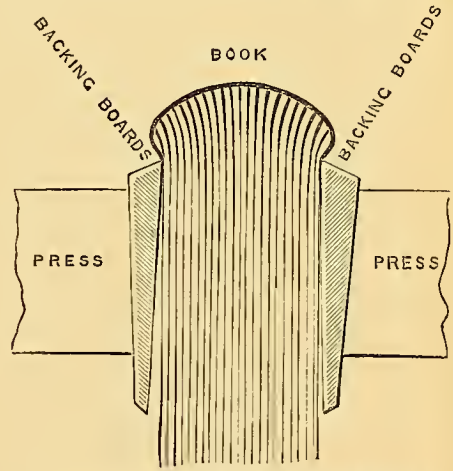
SECTION OF BOOK IN PRESS BEFORE BACKING.
